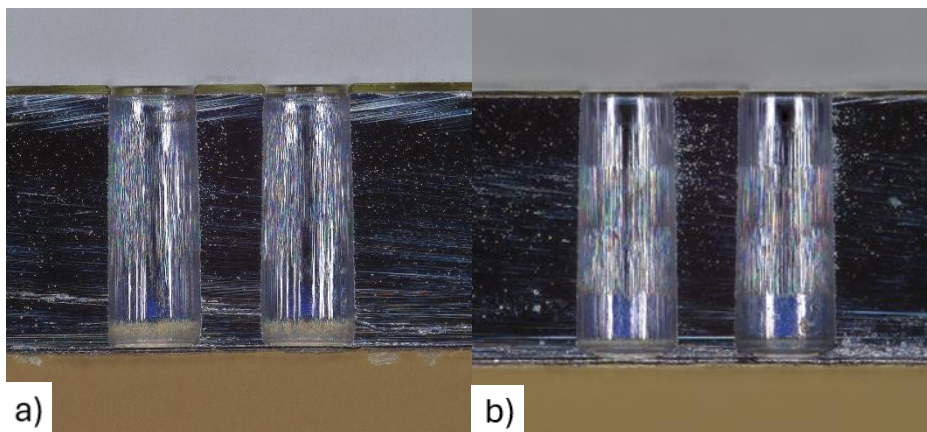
Cross-section view of both samples; a) Chromium sample; b) Aluminum sample
